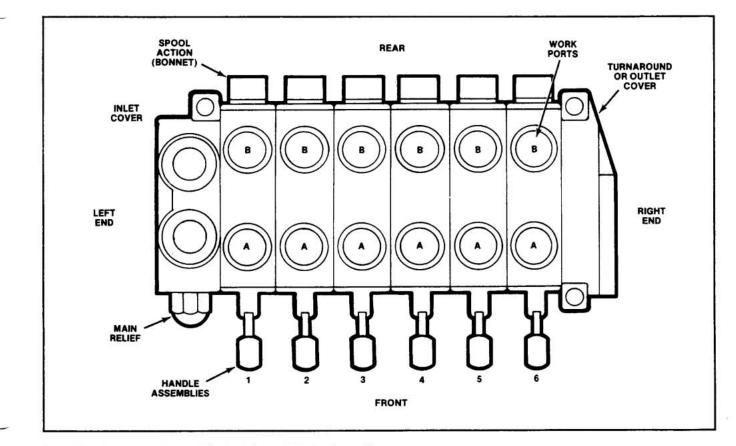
Schematic-View of Typical Control Valve Assembly.
